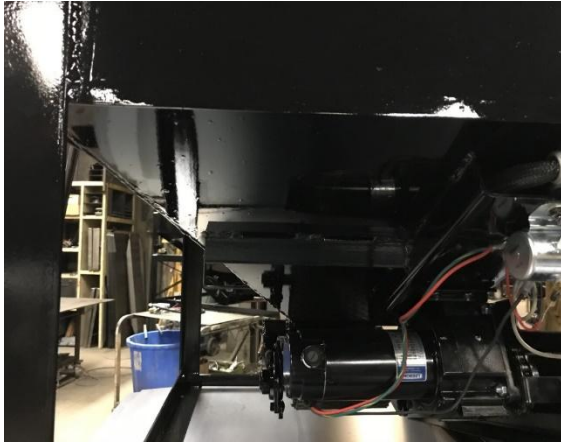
Caker- where vibrator plate will mount. Note the position of the vibrator on the mount plate.
